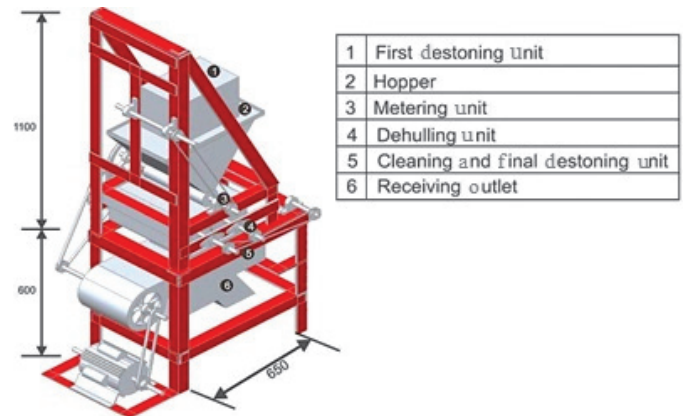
Isometric view of the rice dehussing and destoning machine (All dimensions are in mm)
